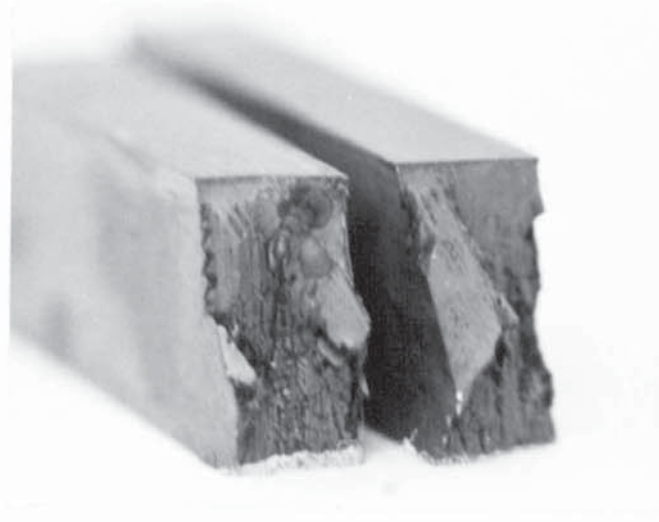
Smooth bar fatigue fractures for alloy SRR 99
